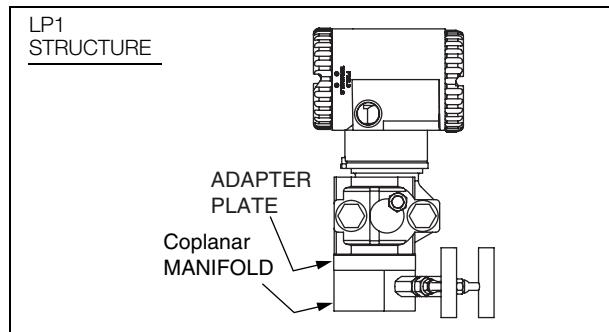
LP1 Shown Mounted to a Coplanar Manifold using an Optional Intermediate Adapter Plate
